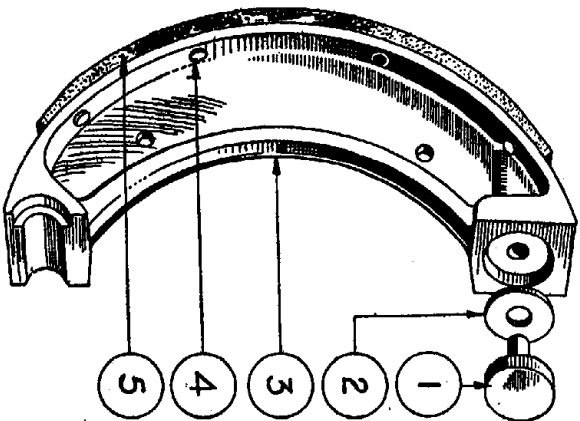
BRAKE SHOE AND THRUST PIN WITH PACKING WASHER.
